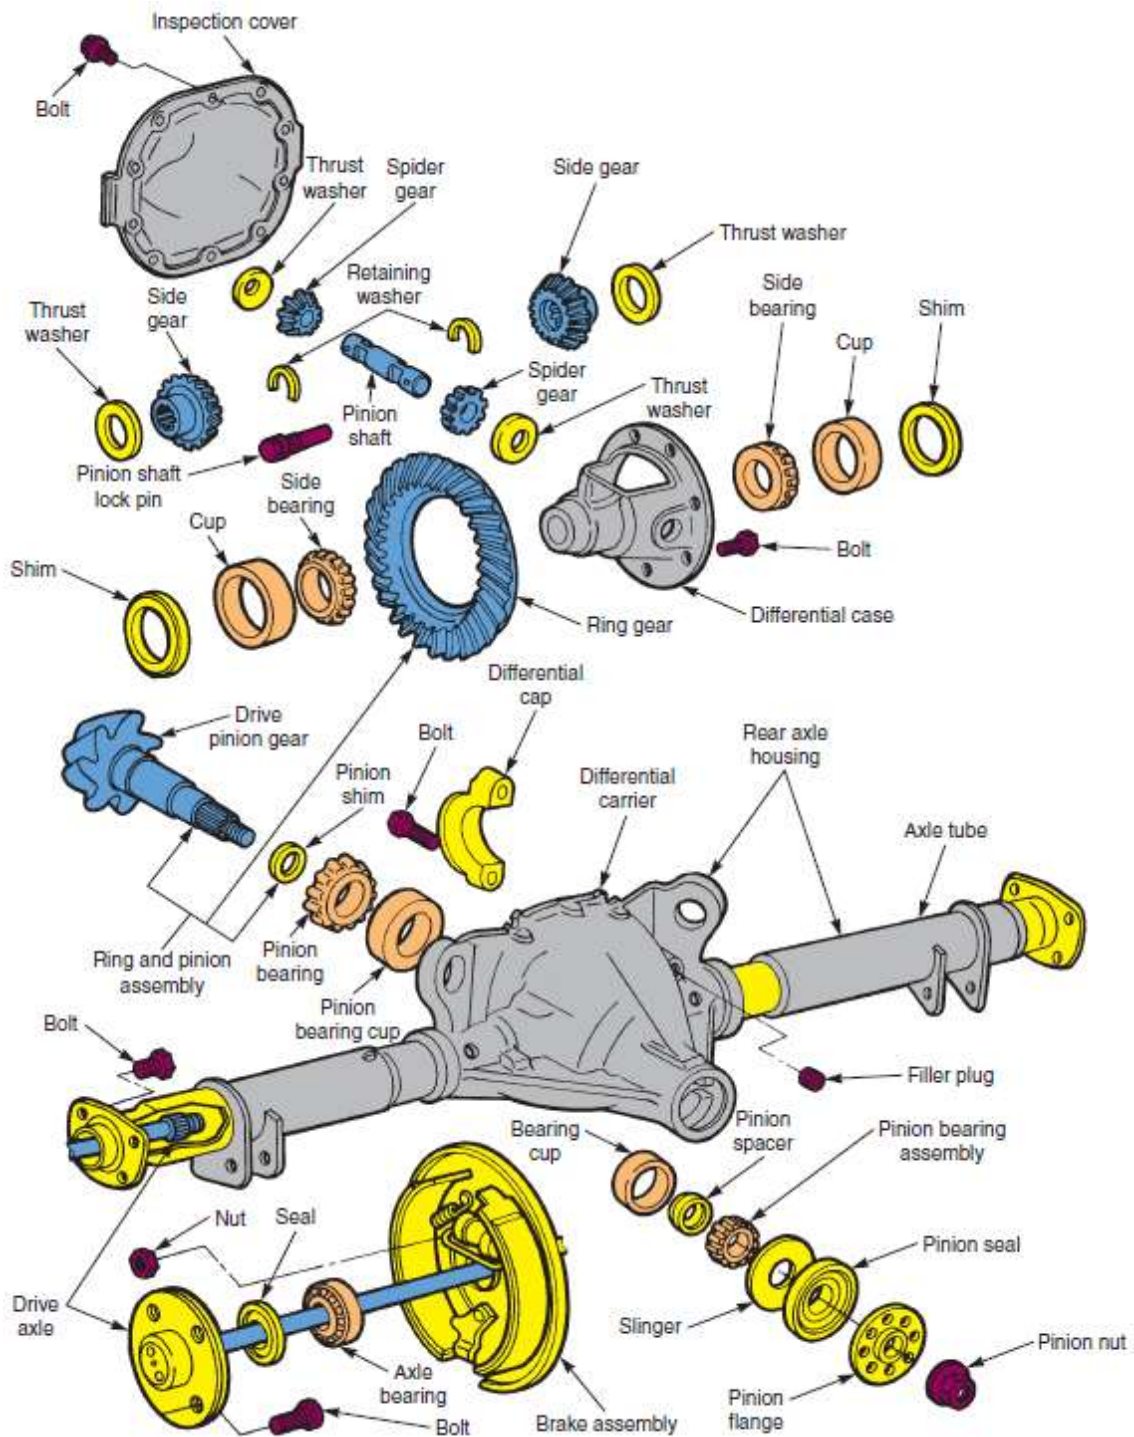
Exploded view of rear axle (Duffy, 2000)
